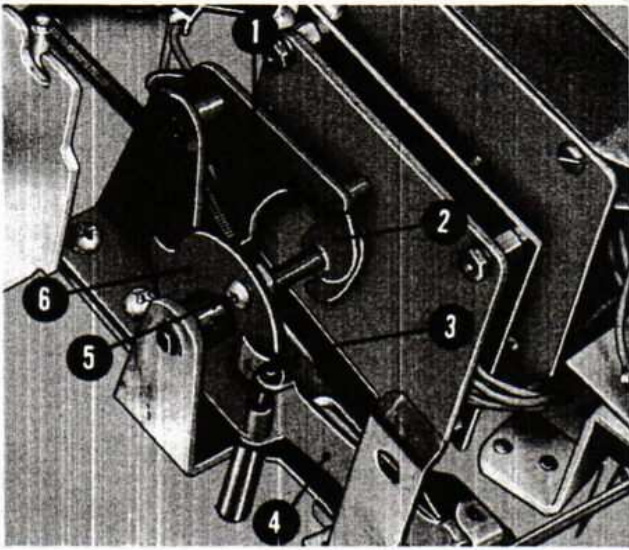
When turned by the motor, the rotary arm assembly contacts the patches on the contact plate and make or break the circuits of the electric selector system. (See Section 12, Pages 71 through 91 of this manual).
